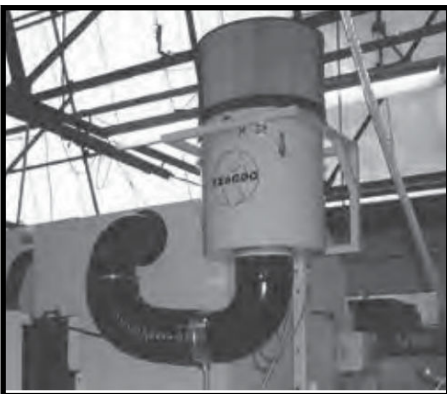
An example of ducting with an unavoidable U-bend and a drainage point.
